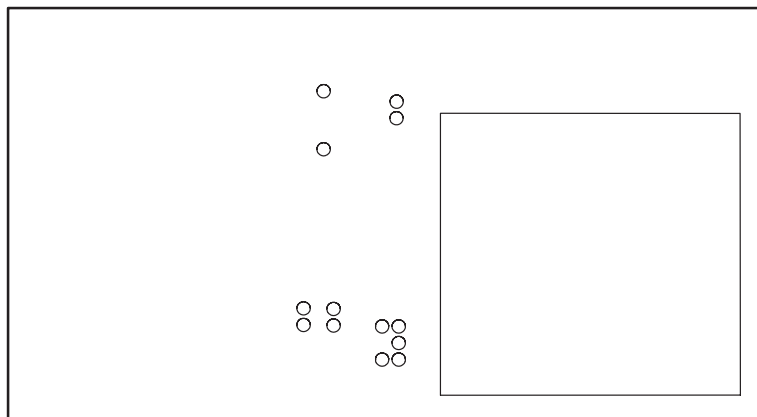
TRF1400 Demo Circuit Board Solder Mask — Bottom Side
